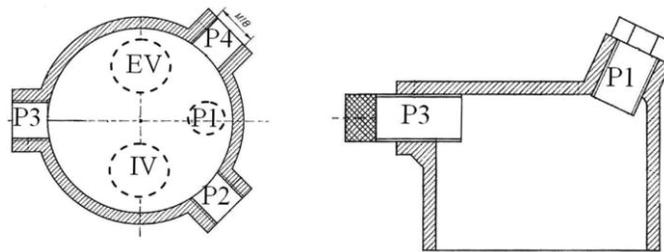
Cross section of the CFR engine, P1: spark plug position, P2-P4: possible sensor positions, IV: intake valve, EV: exhaust valve
